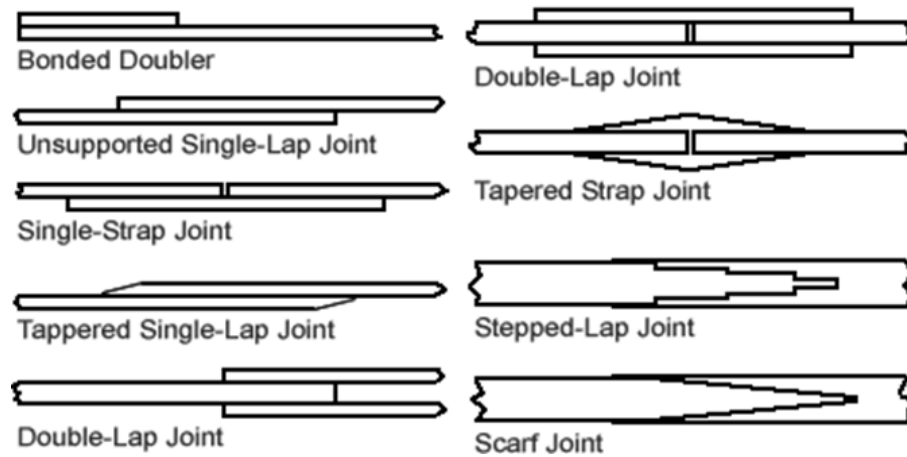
Typical adhesive-bonded joint forms⁷
